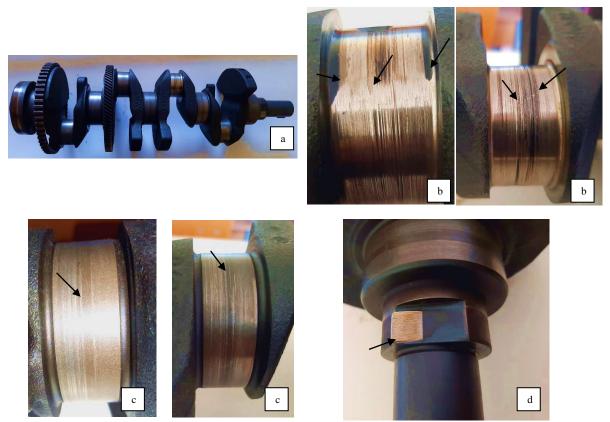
Scratches on the surface of crankshaft: a) general type of crankshaft; b) deep scratches on connecting rod journal; c) deep scratches on main journal d) crank nose journal damage.
